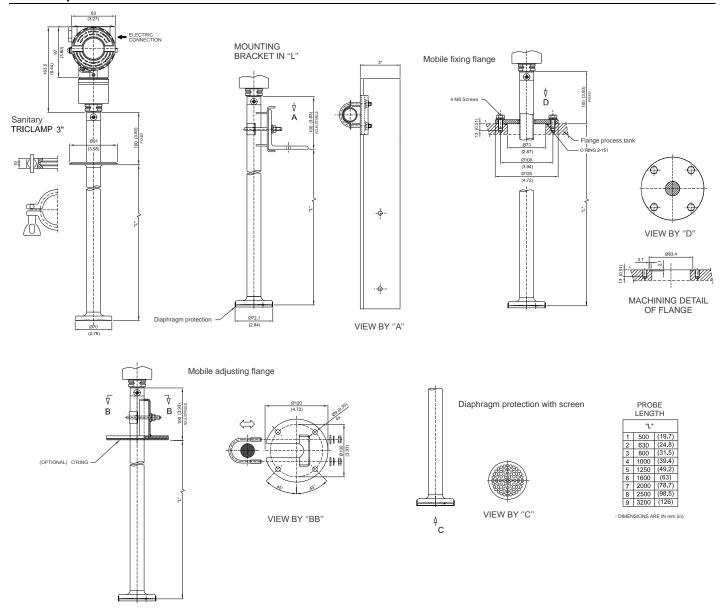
(e) – Dimensional Drawing and Mounting Position for LD291 – Level (Insertion)
